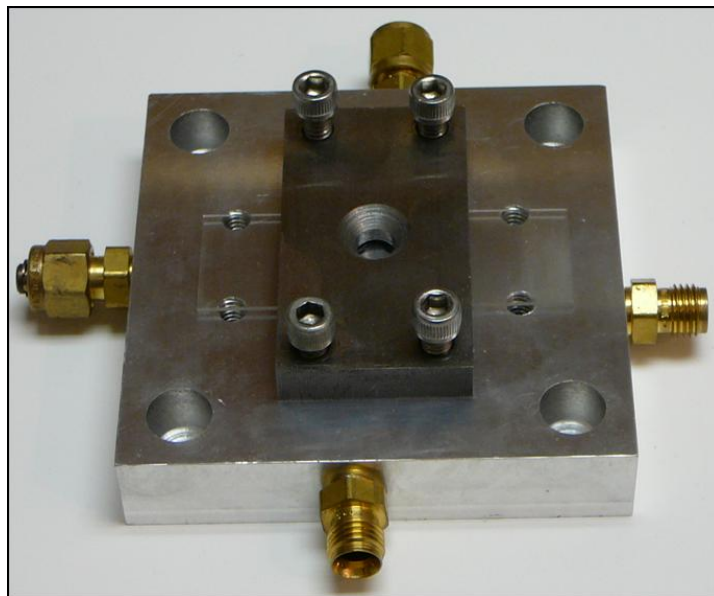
Photograph of Phase 1 microbearing test fixture. Connections on the tops and left are capped off.
